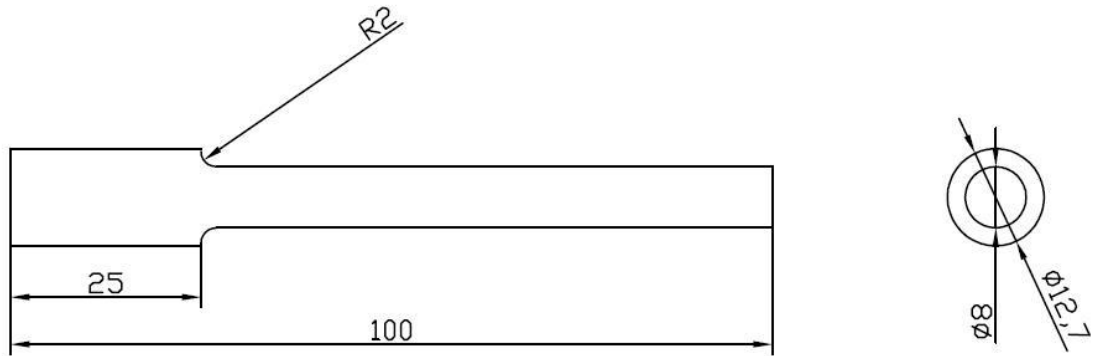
Cross-sectional drawing of specimen making out the dimensions
